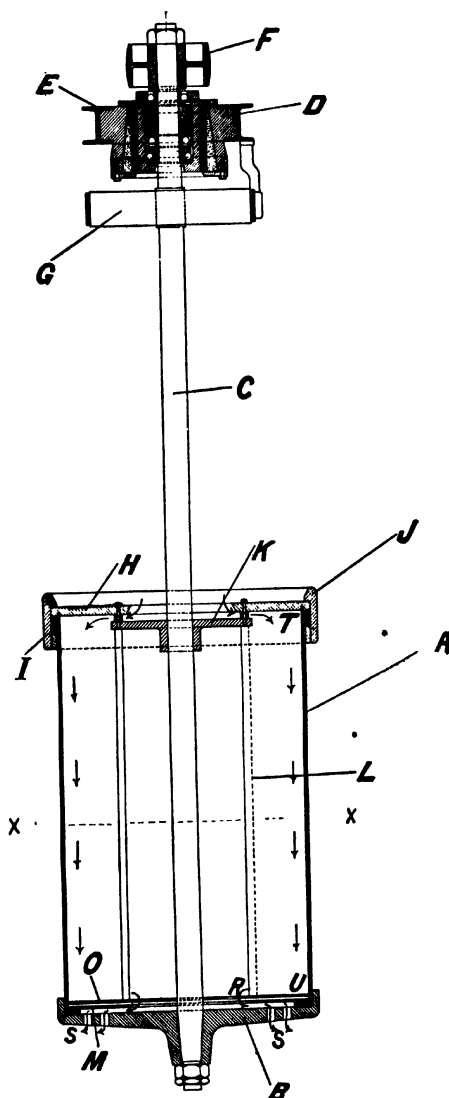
Giee's Centrifugal (Sectional Elevation).
